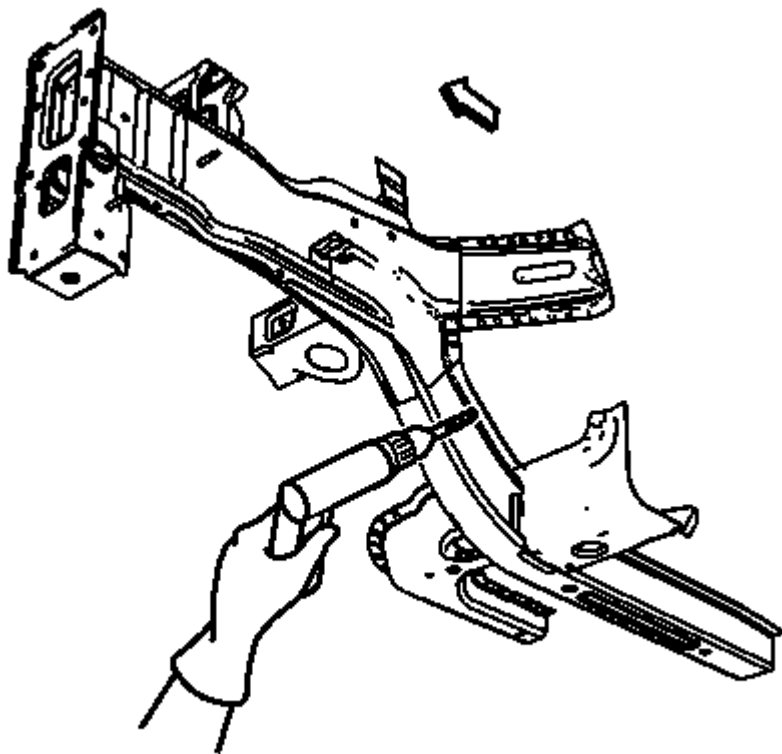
Drilling 8 mm (5/16 In) For Plug Welding Along Edges Of Front Compartment Side Rail
